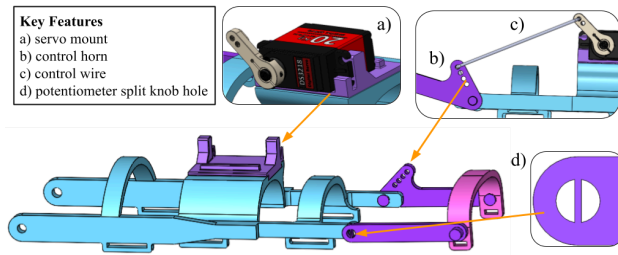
CAD of forearm and hand components in our final W.E.A.R. Bot brace, highlighting key features related to the wrist mechanism
